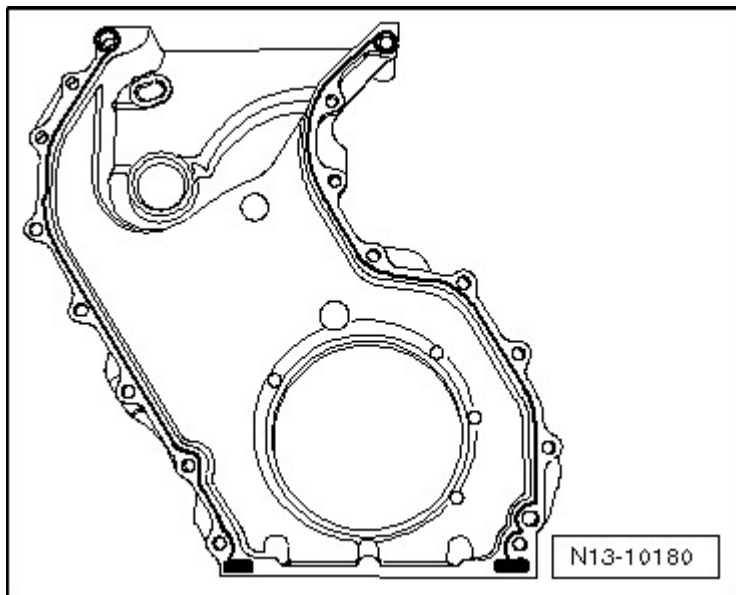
Applying Sealant On Clean Sealing Surfaces Of Sealing Flange
